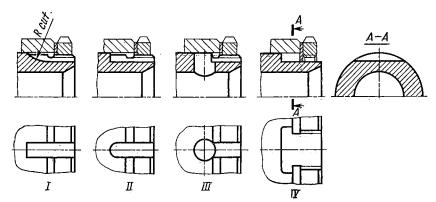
Methods of machining shaft slots for safety washer tongues I—milling by side milling cutter; III—milling by end milling cutter; III—shaping; IV—milling a flat instead of slot
